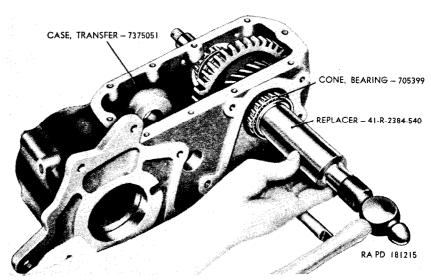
Installing transfer rear axle output shaft inner bearing cone.
